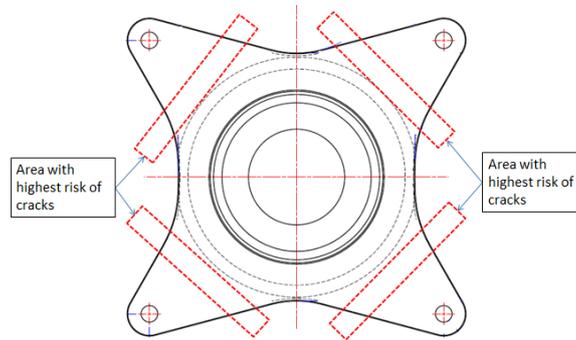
Area on the upper center casting with the highest risk of cracks
